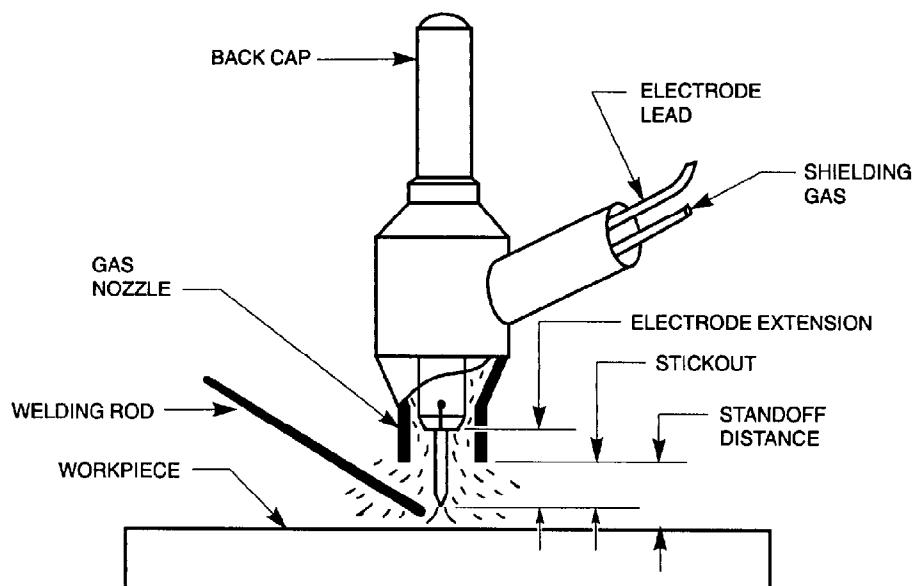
Gas Tungsten Arc Welding Torch Nomenclature
